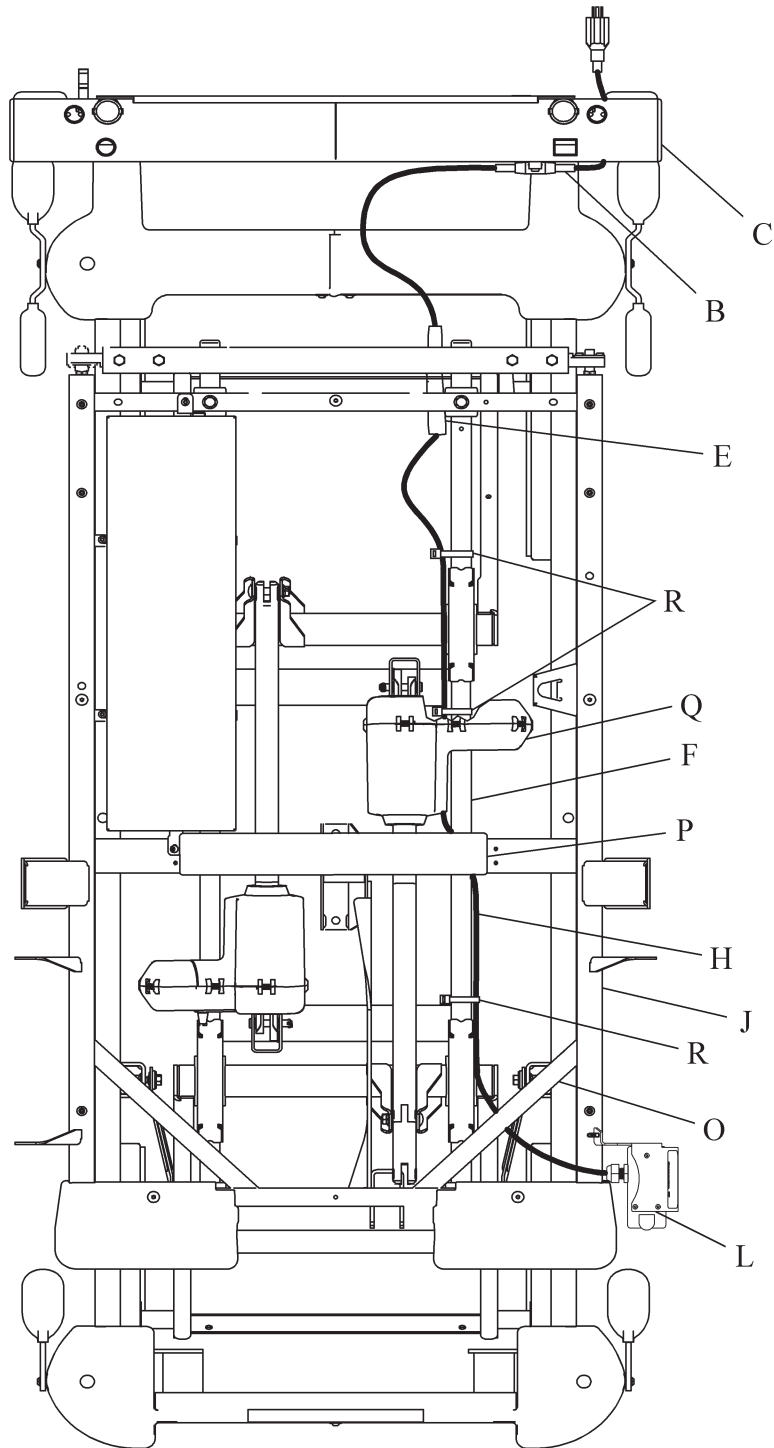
New Routing for Outlet Cable—H Model and Earlier Beds
